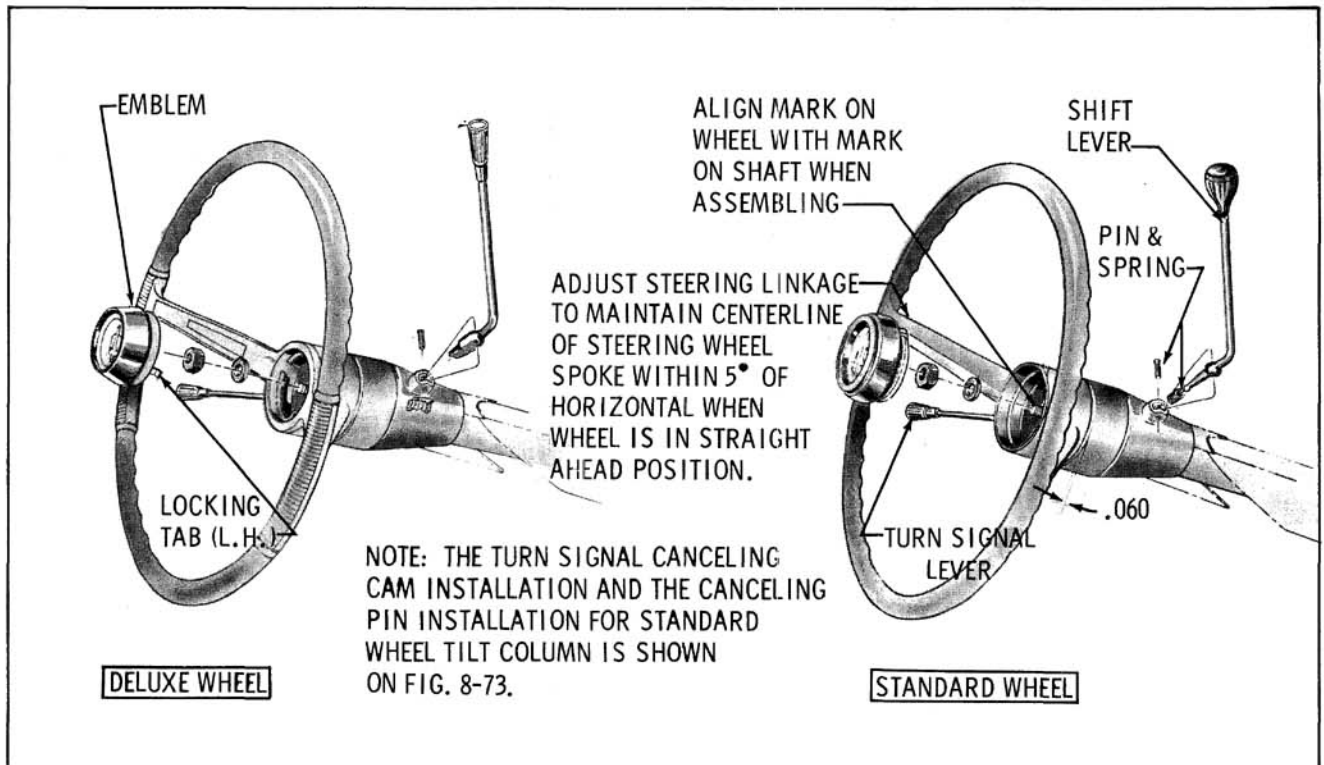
Steering Wheel Attachment (33 through 38 Series)
